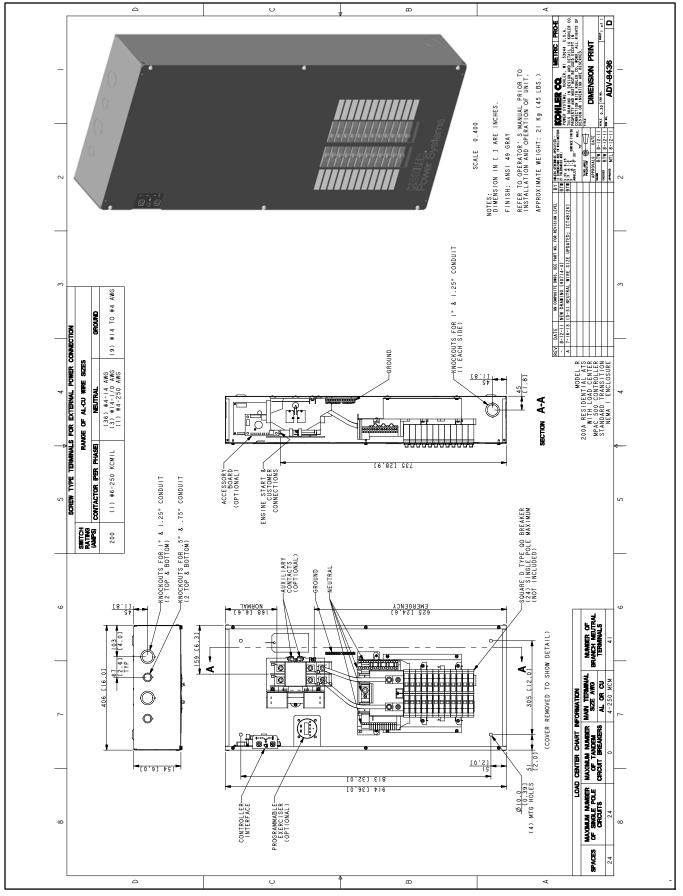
Dimension Drawing, 200 Amp NEMA Type 1 Enclosure with Load Center, ADV-8436
